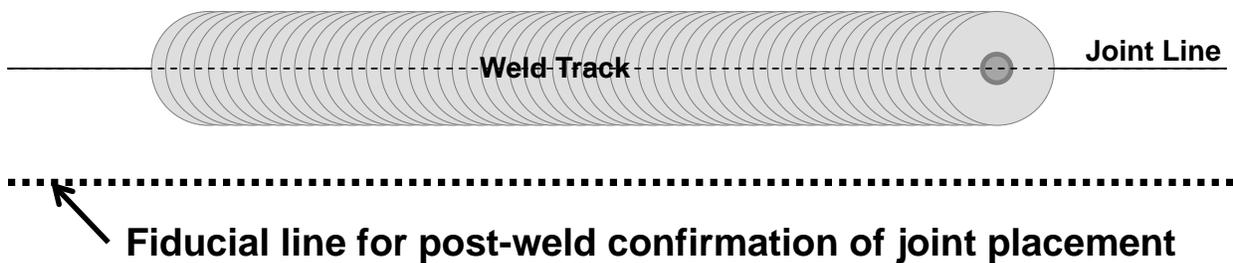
Placement of an offset fiducial line along the joint line prior to FSW to positively locate the weld track relative to the joint line during (e.g., via an optical system) and after FSW
